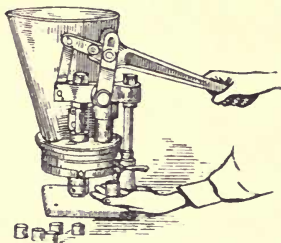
CALKINS' AUTOMATIC CUPEL MACHINE.
